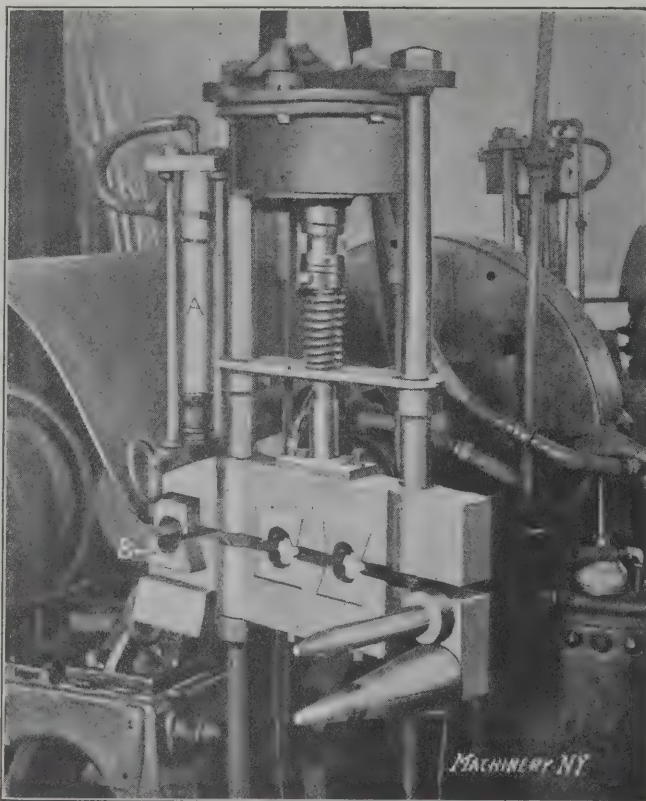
Pneumatic Flue-swage and Welding Die
